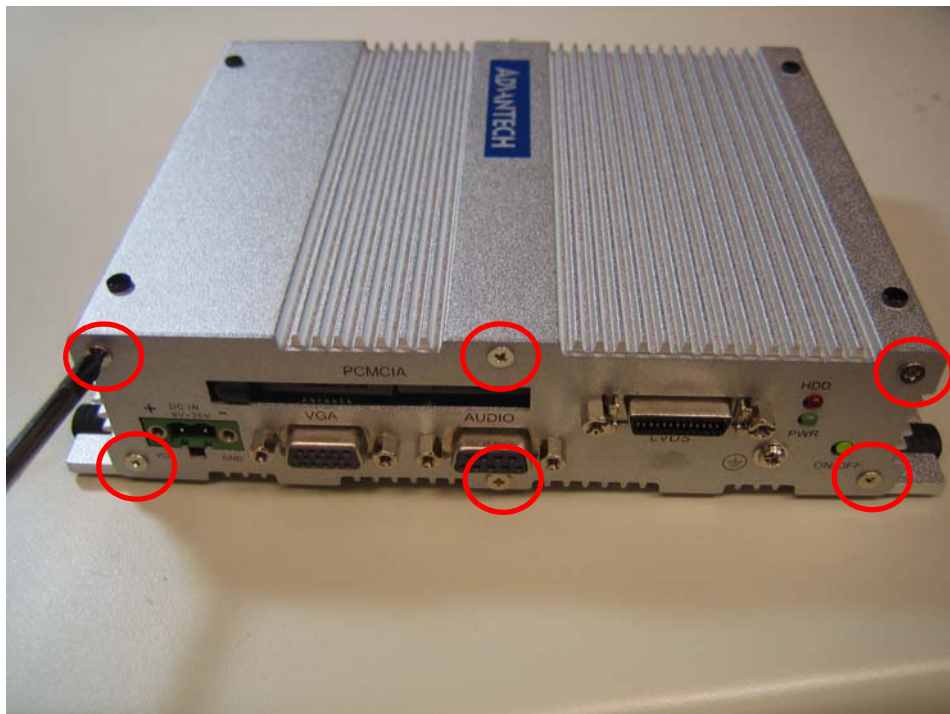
Unscrew the 6 screws on the front side frame
